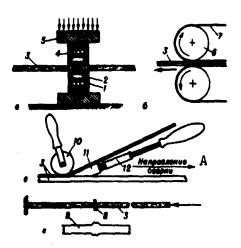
Diagrams of devices for welding plastics with heated element (a, b, c - heat transfer; d - radiation): 1) Heater; 2) water-cooling jacket; 3) components to be welded; 4) electric heater; 5) press cross-head; 6) electrically heated rollers; 7) endless belt; 8) strip heater; 9) welded component; 10) pressure roller; 11) heated wedge; 12) electric heating element. A) Welding direction.
